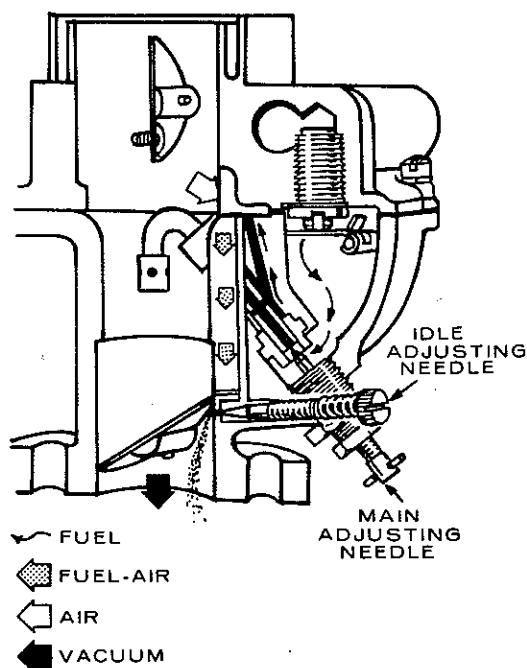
CARBURETOR IDLE SYSTEM
